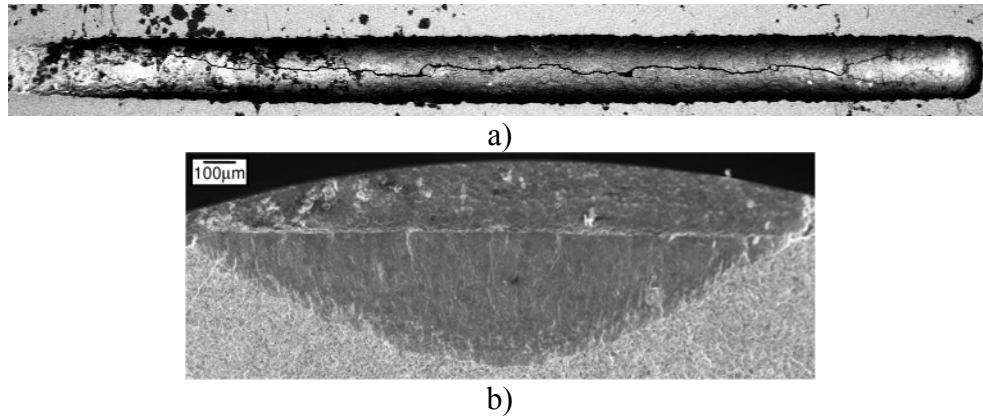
OOP fatigue test fractography; specimen tested at $\Delta K_{III}=0.85\Delta K_{th,I}$ test interrupted at $N_f= 1.2 \cdot 10^5$ cycles: a) specimen surface; b) 90°tilted view, coplanar Mode III crack, 400 μ m deep.
